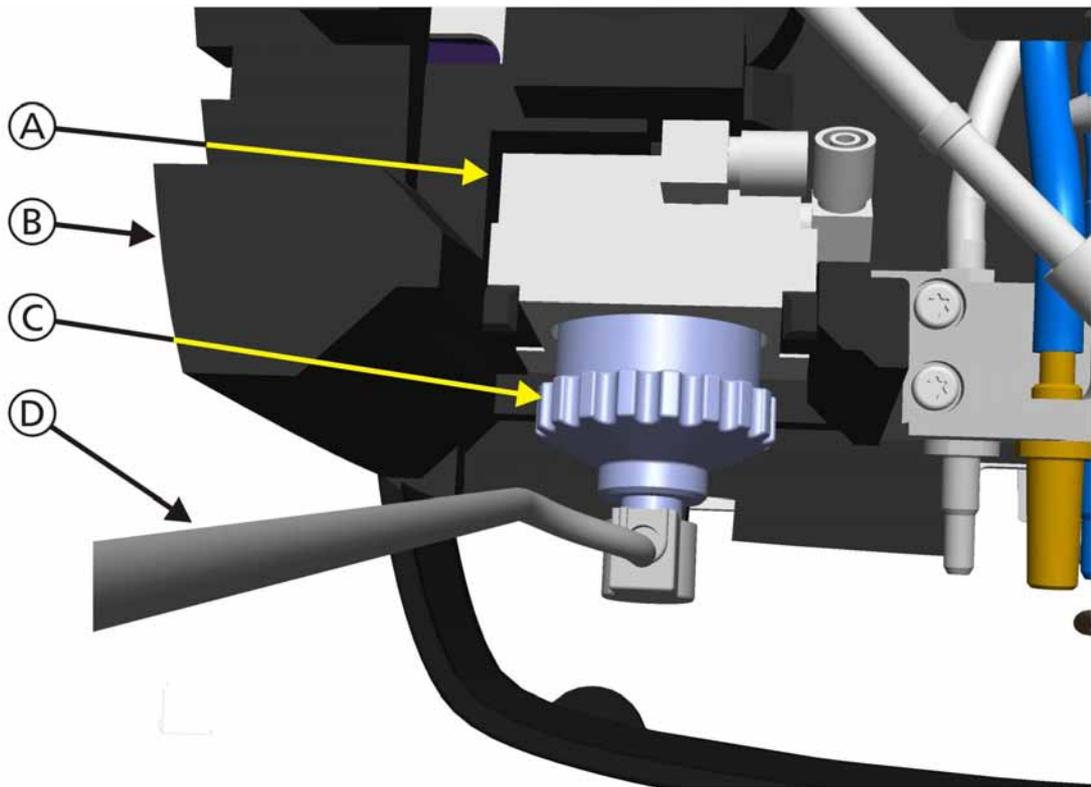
Oxygen Sensor Block and Tubing Assembly, Step 1
